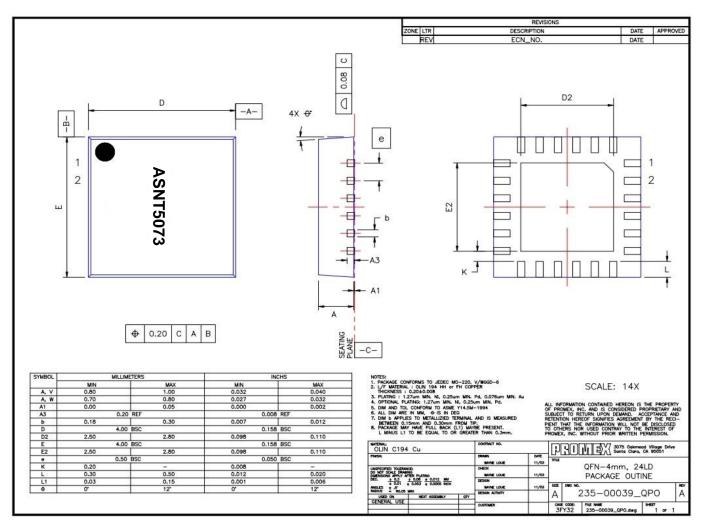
QFN 24-Pin Package Drawing (All Dimensions in mm)
